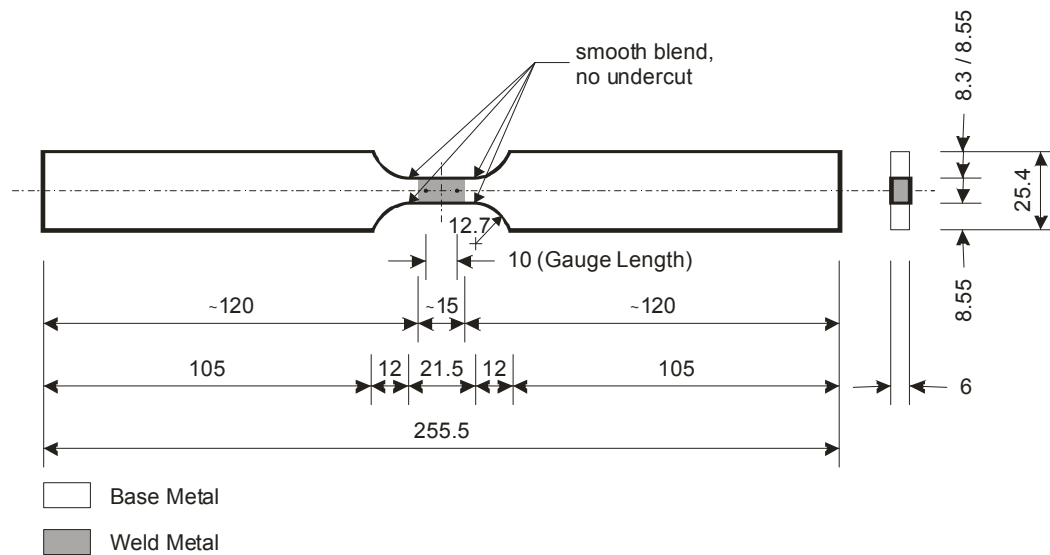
Smooth specimen for fatigue crack initiation tests (dimensions in mm).
